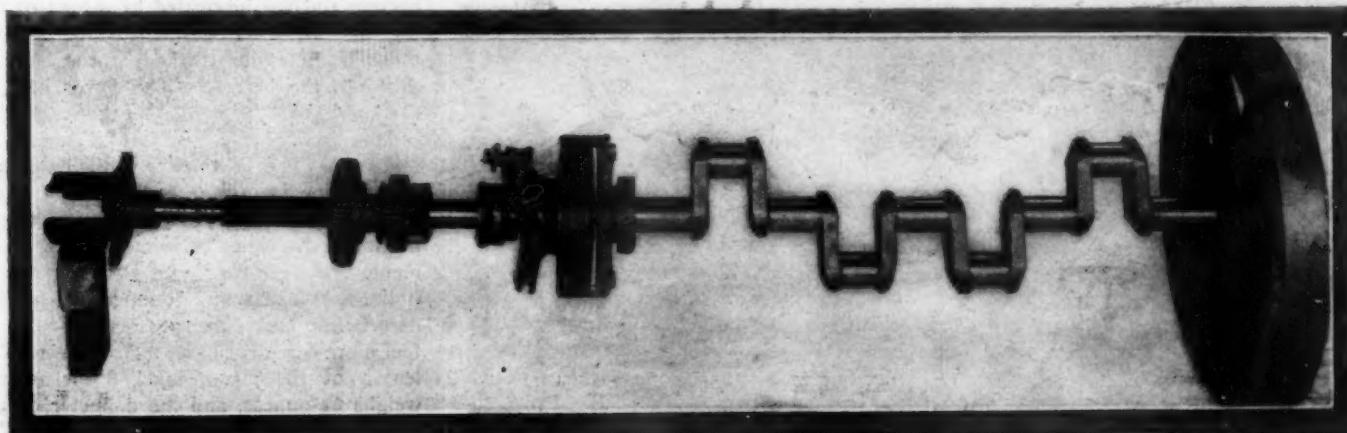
Showing the assembly of the flywheel, crankshaft, clutch, primary shaft of the transmission, sliding gears and universal joint
